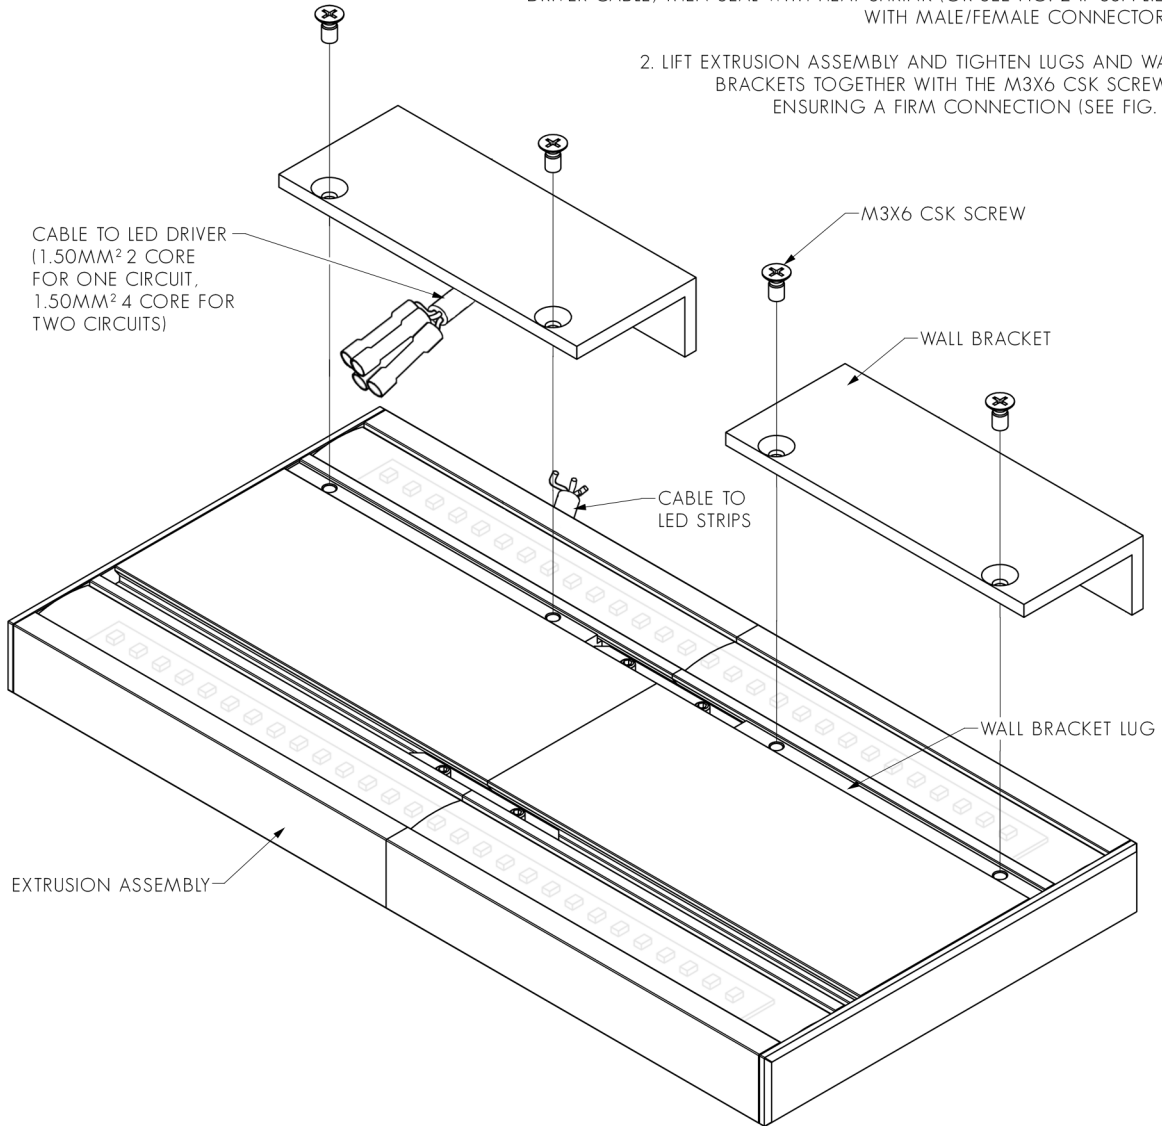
ENSURE EXTRUSION IS MOUNTED SECURELY
